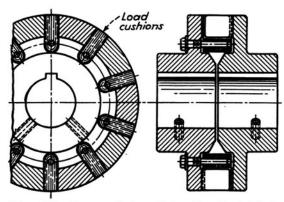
In one design of Lovejoy Tool Works flexible coupling, individual free-floating load cushions are hung between the flange jaws on removable studs. These replaceable cushions are made of brake-lining material, leather or rubber-duck fabric, depending on the loads sustained and the resilience required. No lubrication is needed.
